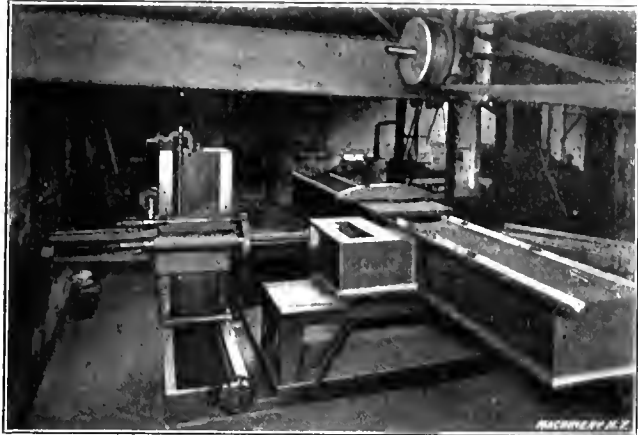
Large Boring Mill with 8- x 30-foot Open-side Planer Bed in Position
